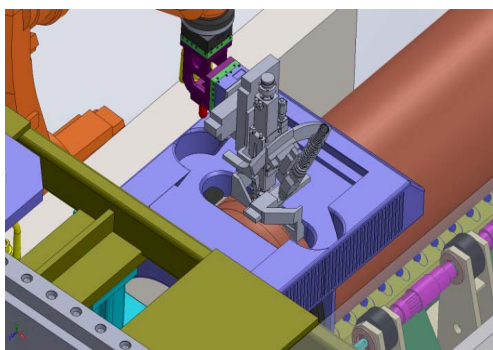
UFC- Hybrid Laser Welding using robot “A”
